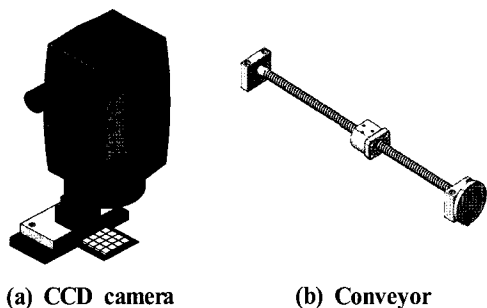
Photographing tool and emitting light lamp image / Ball screw
